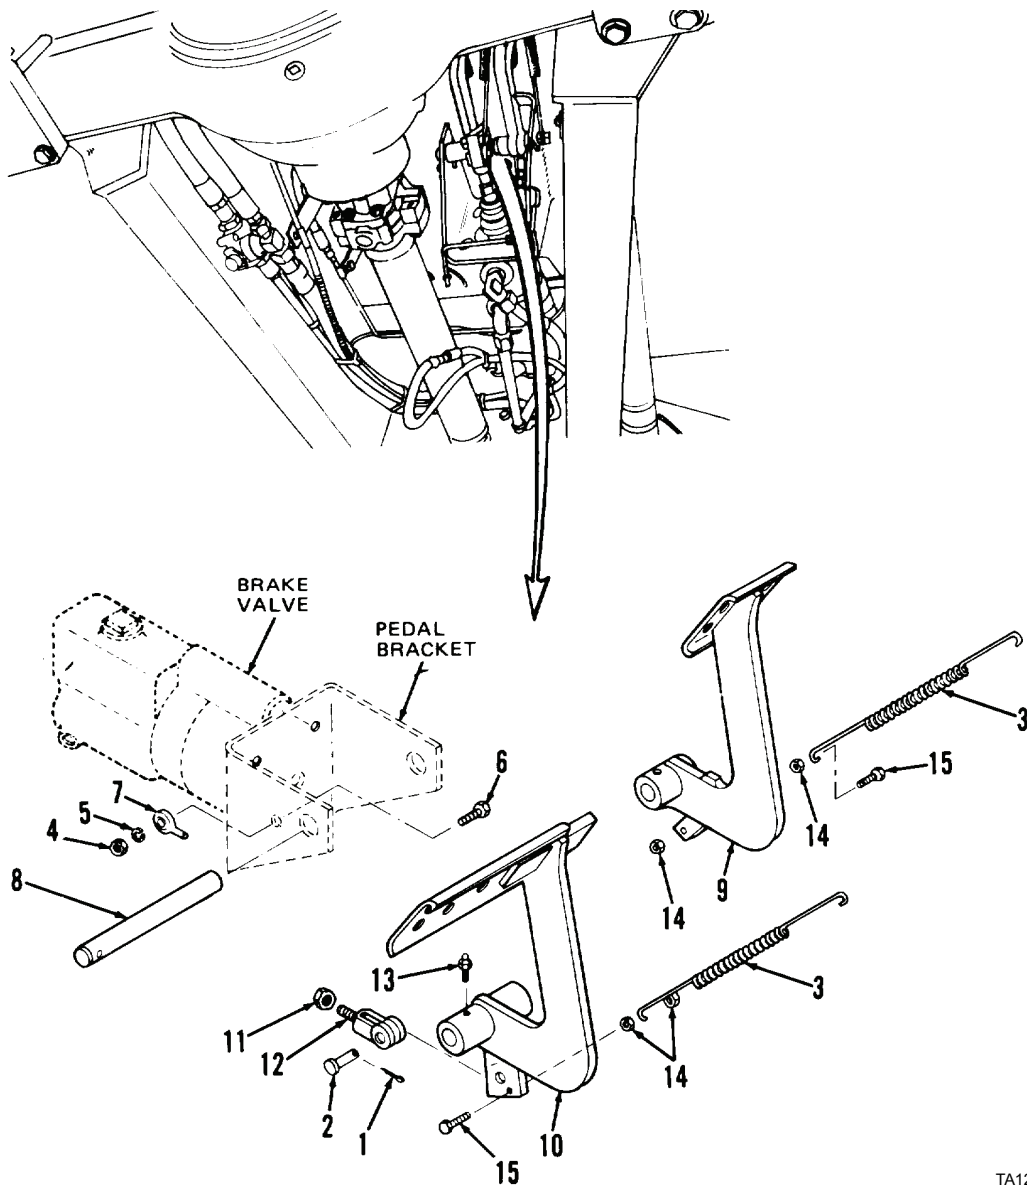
Brake Pedal and Declutch Pedal Assembly.
